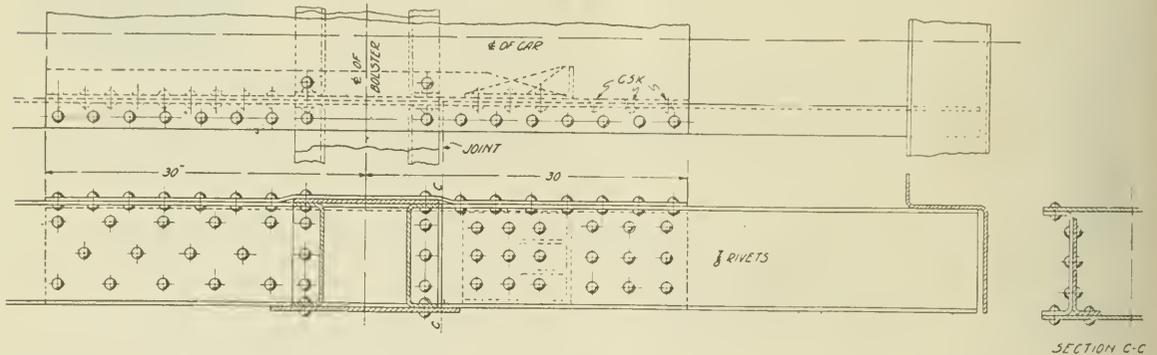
Steel Center Sill Splice (Inside), Less Than 8 Inches From Face of Body Bolster
